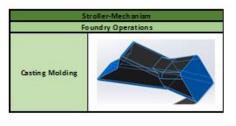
Casting Process - Central Axis/Common Part/Clamp_Part 3/Stroller-Mechanism
